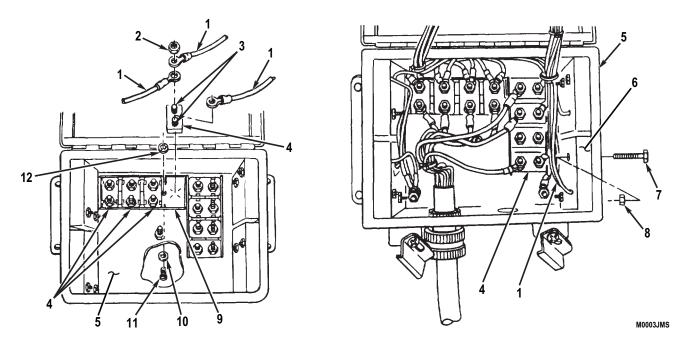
Signal Conditioning Box Internal Parts Assembly.
